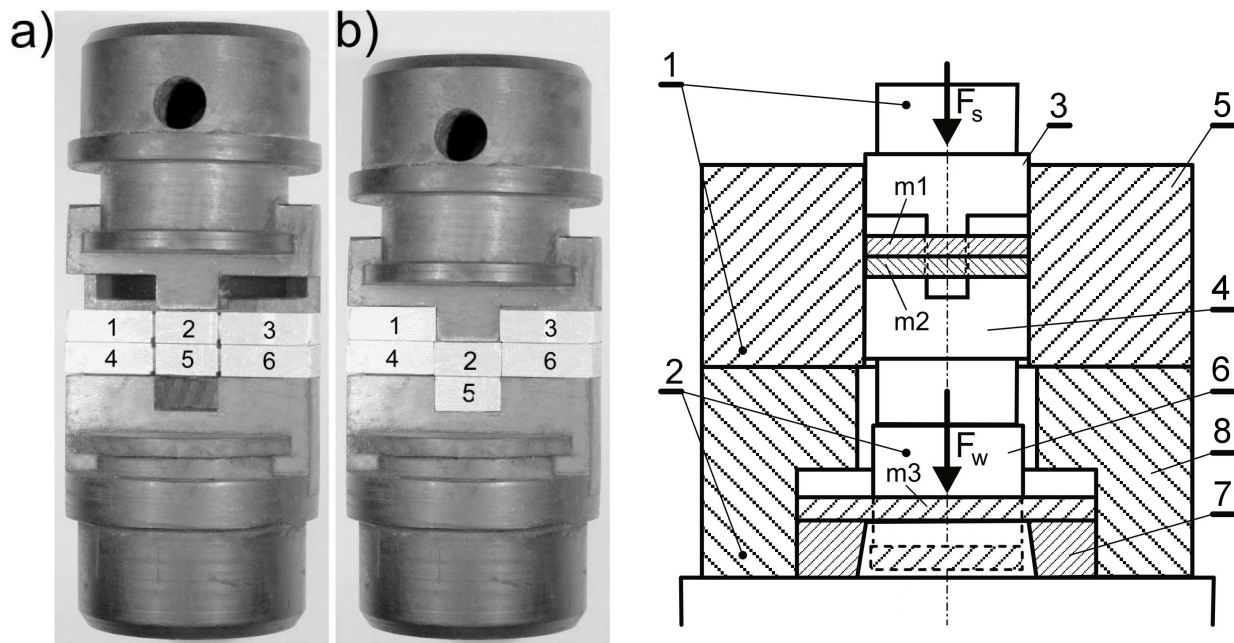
Device for testing the weldability of aluminum alloys - main tools (left) and axial section (right) (a) before shearing, (b) after shearing and welding (1) main tool subassembly (2) auxiliary tool subassembly (3) upper cutting punch (4) lower cutting punch (5) container (6) blanking punch (7) cutting board (8) casing
